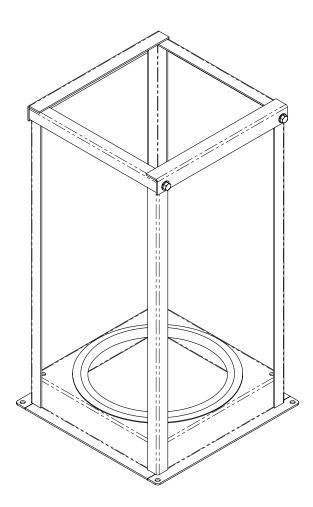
Frame Base Kit Assembly 000-163-619 Rev. A
